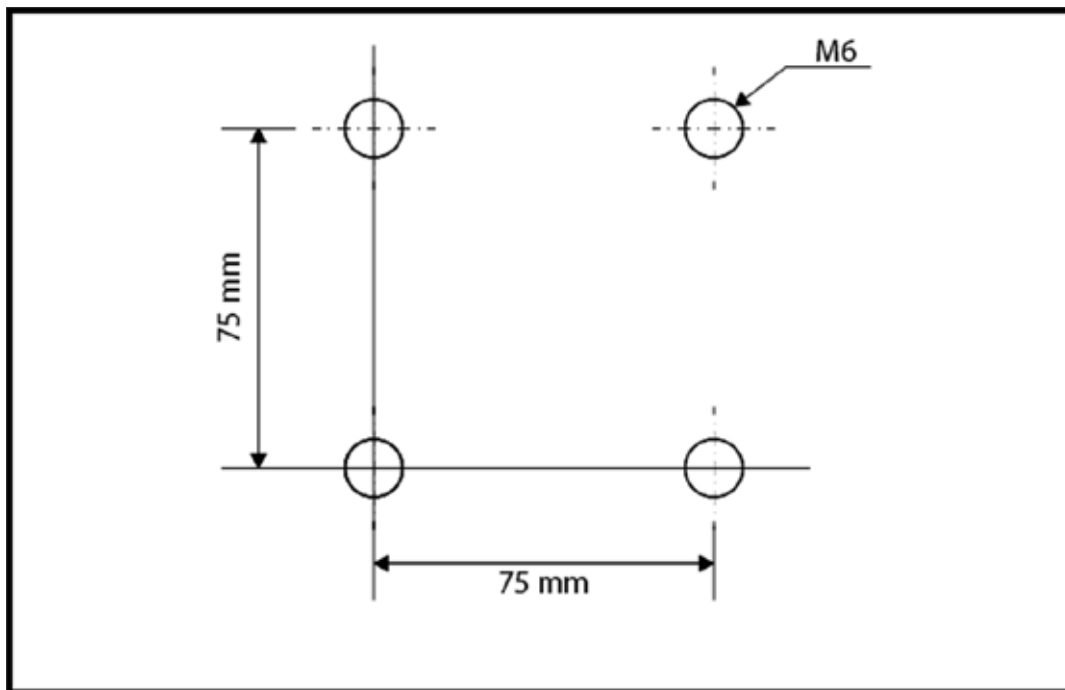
Drill hole sketch with hole pattern 75 x 75 mm
